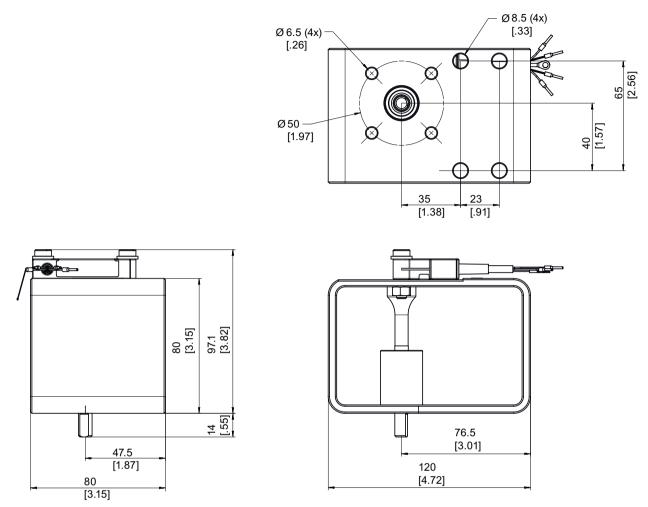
Dimension drawing NCS module > 14 mm (0.55 inch)
